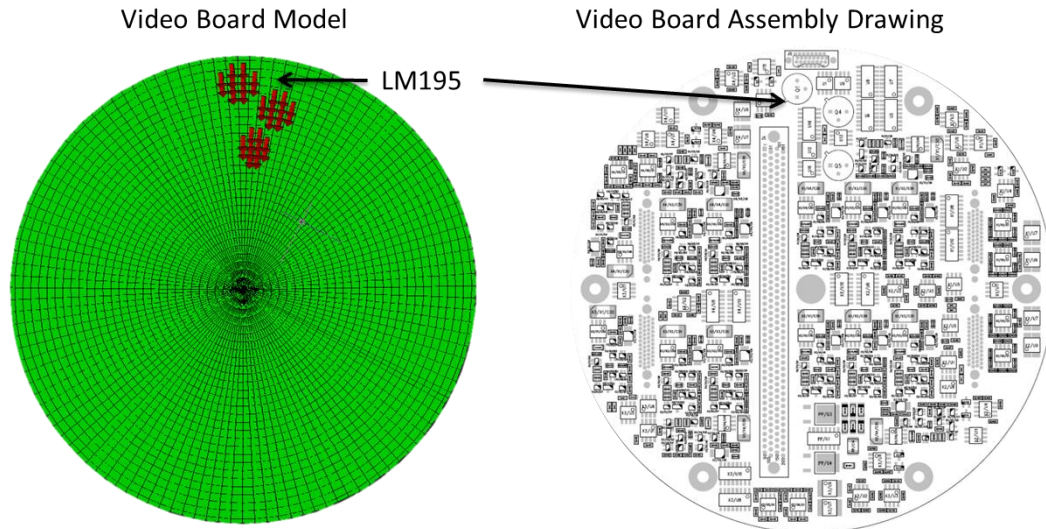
LM195 Heat Loads compared to Board Layout Drawing
